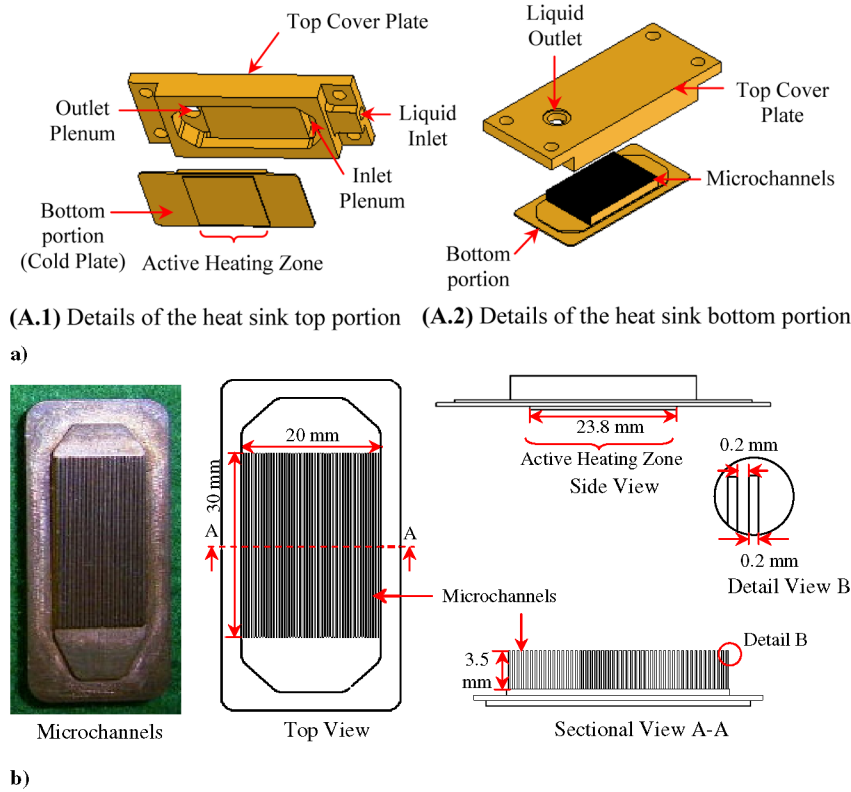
Detailed description of the microchannel heat-sink assembly: a) exploded view of the microchannel heat-sink assembly showing the top and bottom portions and b) picture and schematics of the microchannels.
